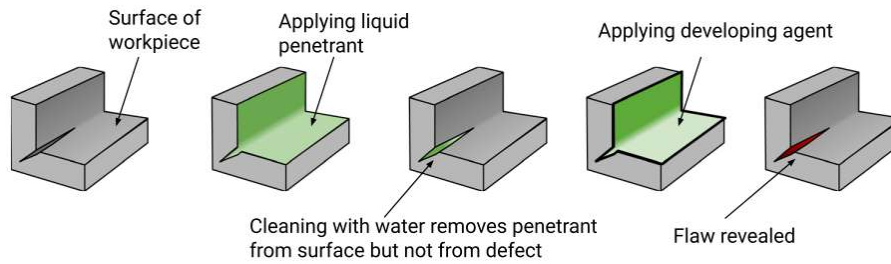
Liquid penetrant testing of manufactured components for identification of surface defects [11].
